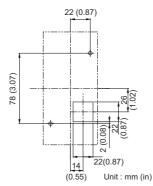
Panel Cut-out Dimensions (External/Face-mount Installation)
